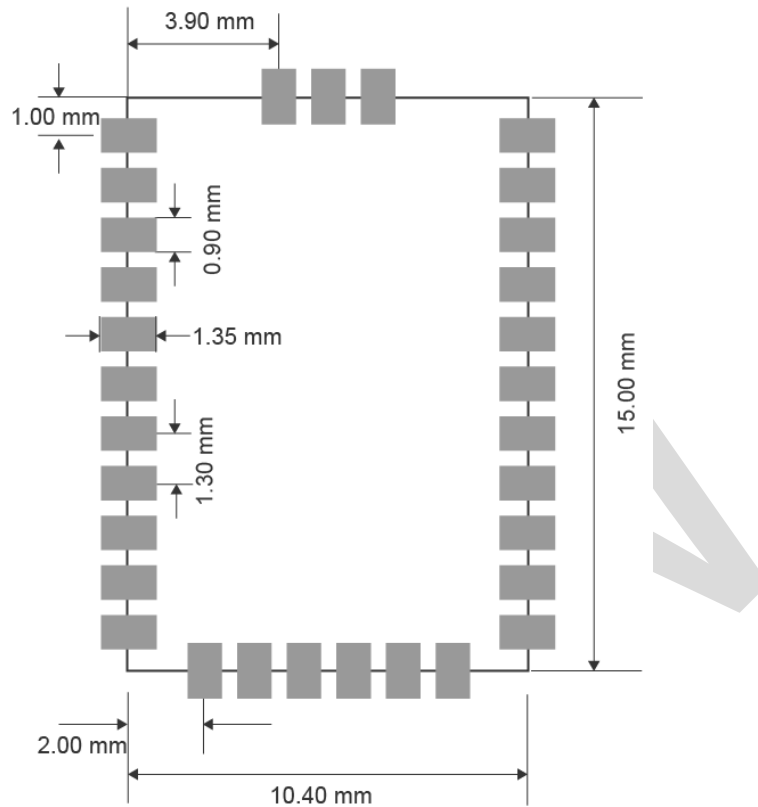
Recommended PCB Footprint of CB1730-Q31P
